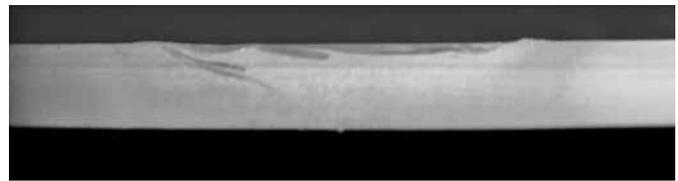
Macrostructure of the FSW welded joint of Cu99.
